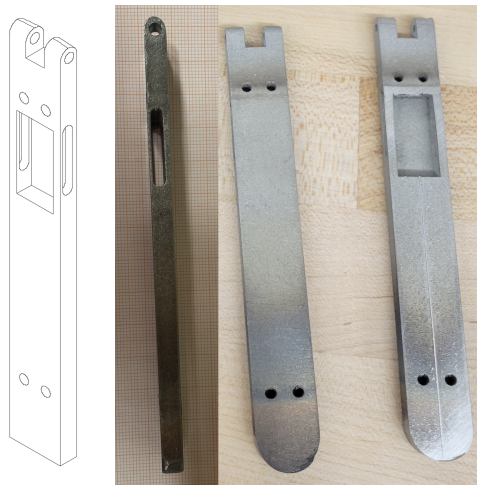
CAD Drawing (left) and as constructed (right) flap lever arms
